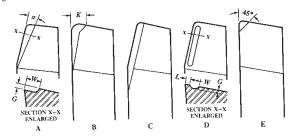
Different Forms of Chipbreakers for Turning Tools
